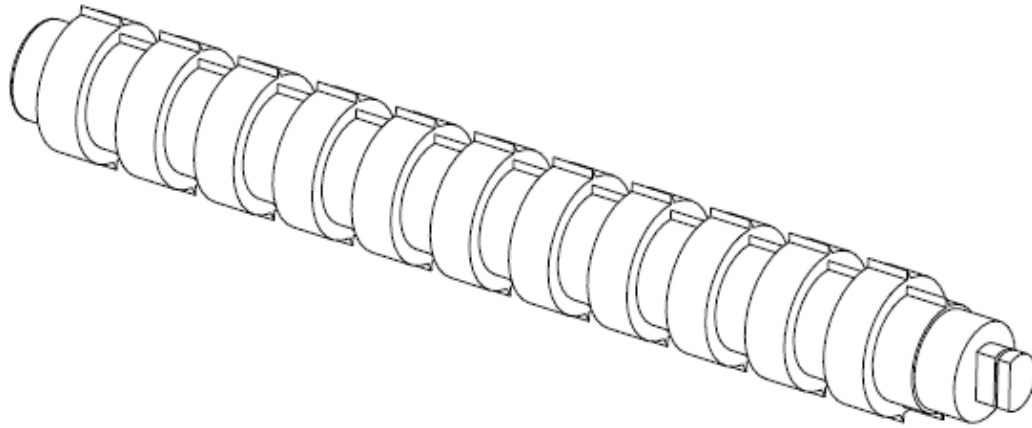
Isometric view of the 30mm chinchin cutting shaft
